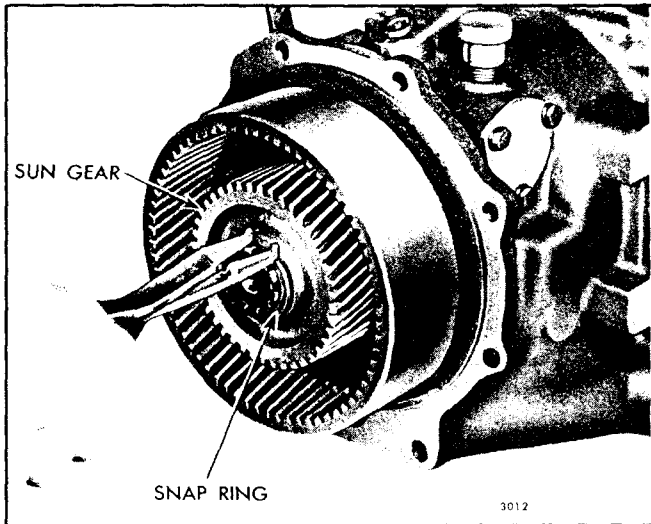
Removing or Installing Reduction Gear Sun Gear Snap Ring from/on Input Shaft (2.5:1 and 3:1 Ratio)
